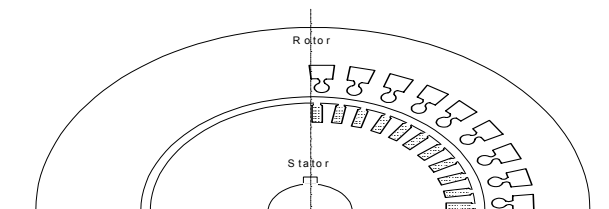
Sectional diagram of rotor and stator of □ slot type IM.
